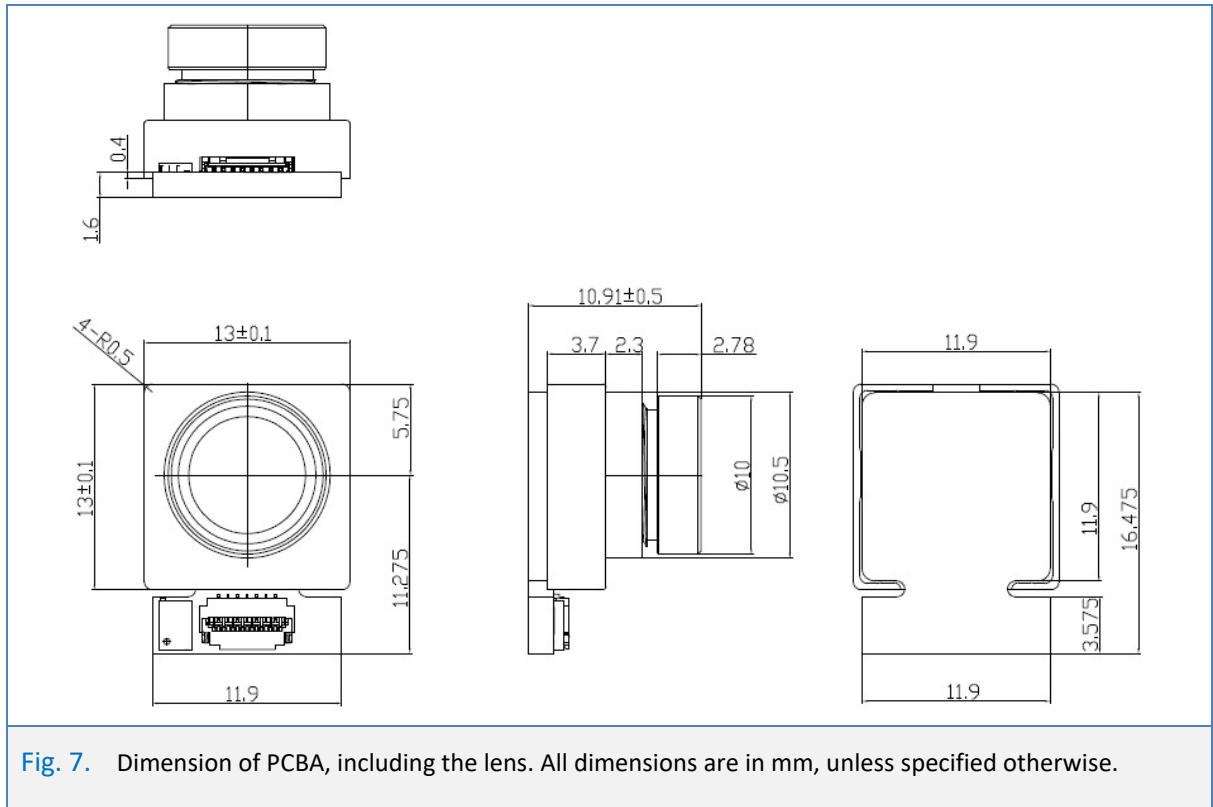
Dimension of PCBA, including the lens. All dimensions are in mm, unless specified otherwise.
